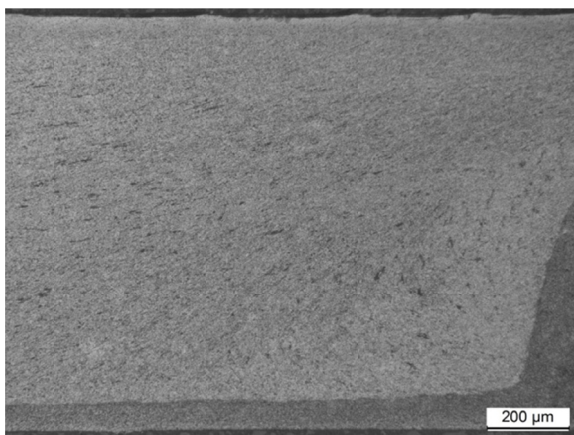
View of the material flow lines in joint of AA 2024 T3 sheet of 1 mm thickness using ceramic tool with smooth shoulder at 1000 rpm and welding speed 200 mm/min (No. 5)
